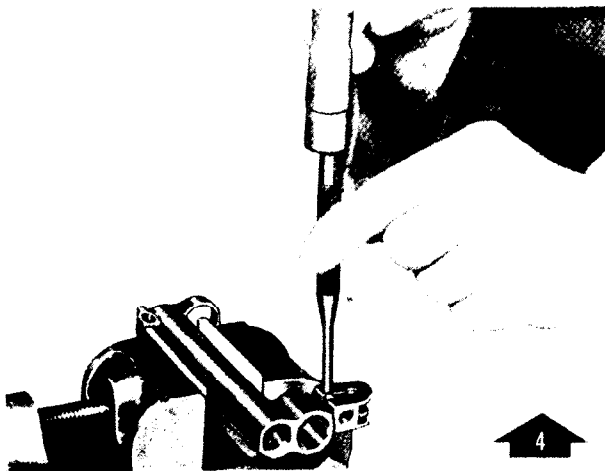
Disassembly/assembly of gas cylinder group. (1 of 2)
